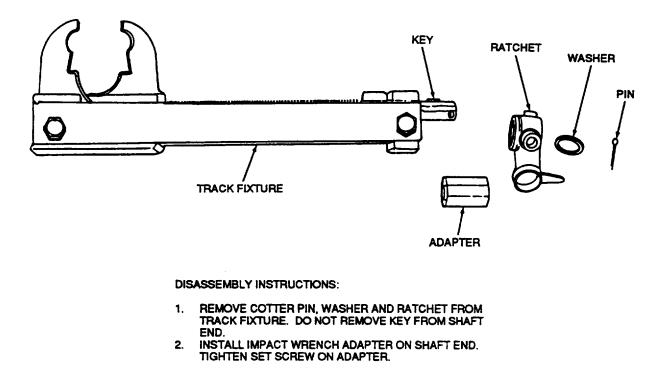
Disassembly of track fixture for use with hydraulic impact wrench adapter.
